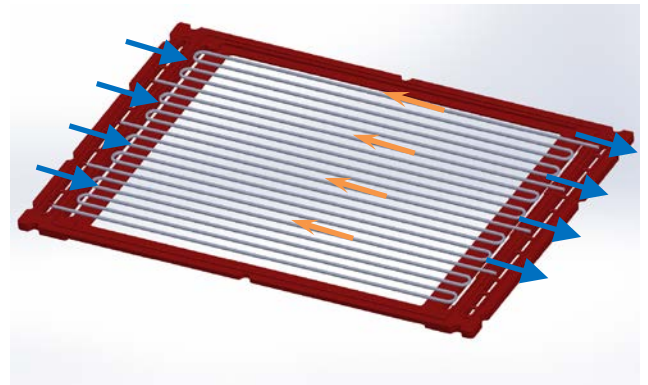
Copper minitubes to ensure internal cooling/heating I 3F-CMCs; U-shaped minitubes arrangement in a module frame.
